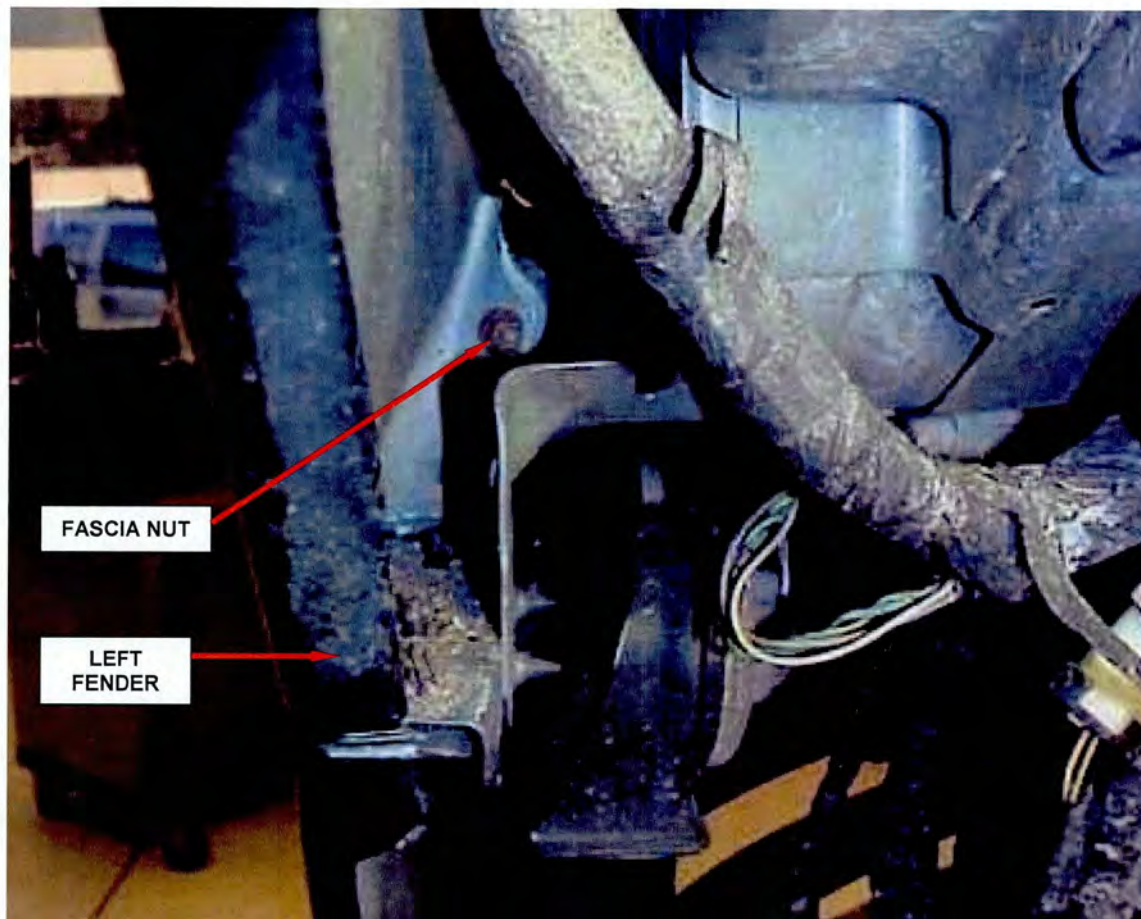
View from Inside Wheel Opening (Left Side Shown)
